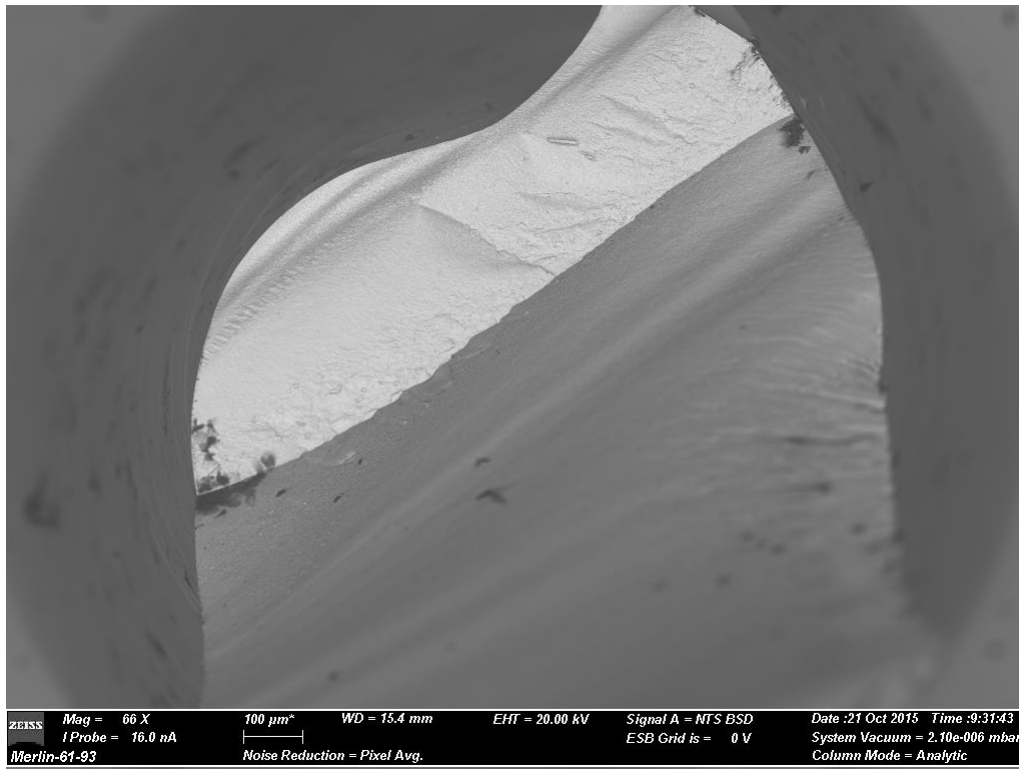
Experimental run 20: Tungsten carbide tool after machining with parameters $v_c = 75.4$ [m/min], $v_f = 768$ [mm/min] and $a_p = 156.25$ [μm]
